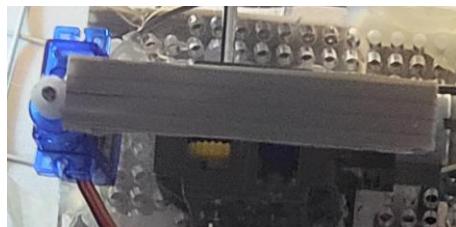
The servo rod is attached to the servo motor by inserting the shaft into the board.
